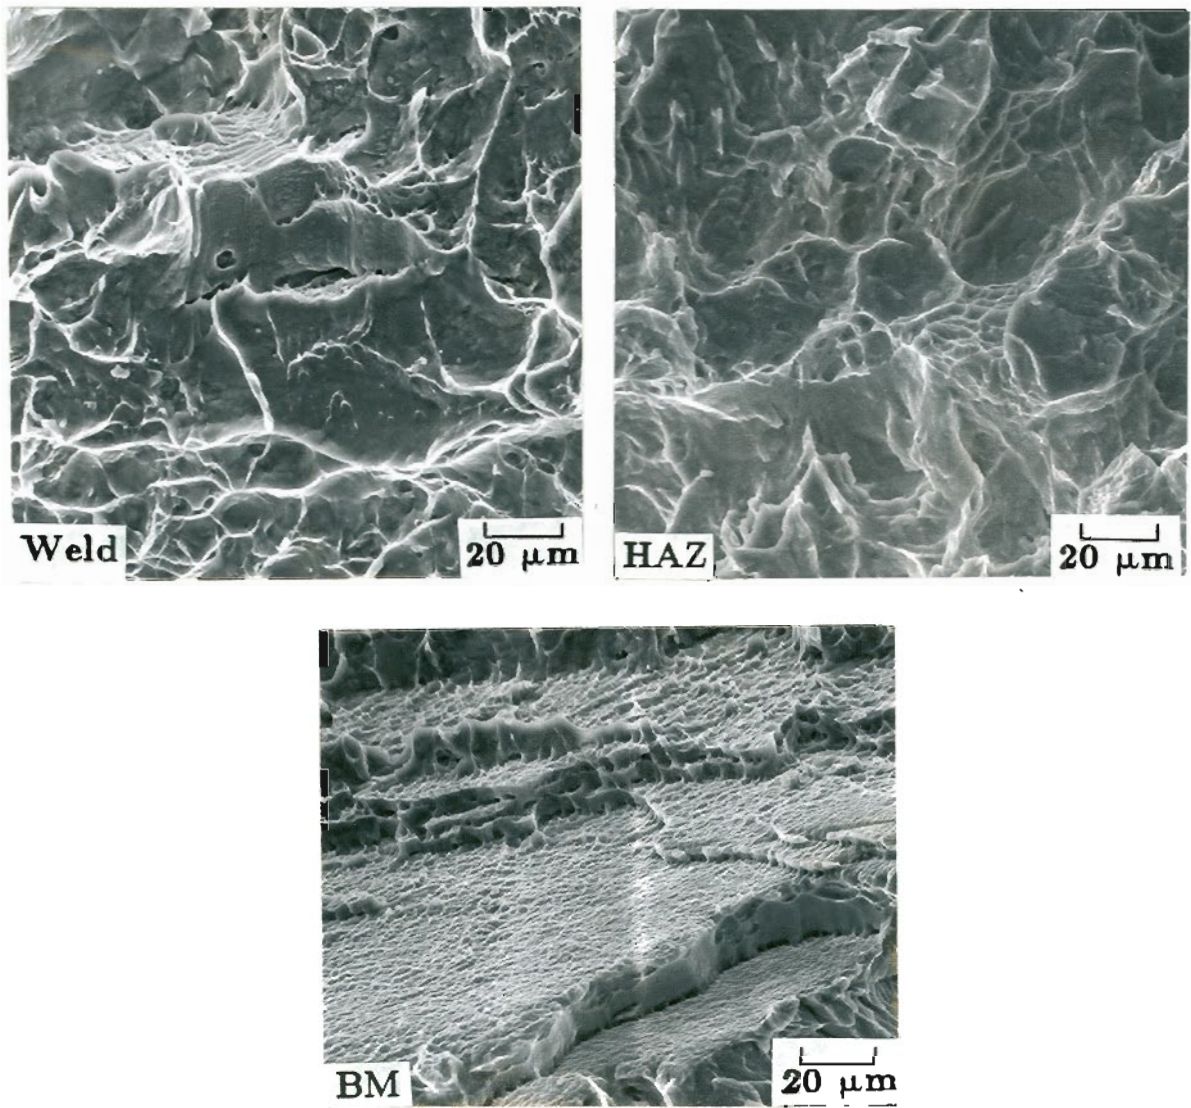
Enlarged fractographs of the weld metal, HAZ, and BM show a quasi-cleavage fracture and crack branching in: (A) Ti-6Al-4V weld made with reagent grade CaF_2 flux, (B) Ti-6Al-4V weld made with high purity CaF_2 flux, and (C) Ti-6211 weld made with high purity CaF_2 flux.
